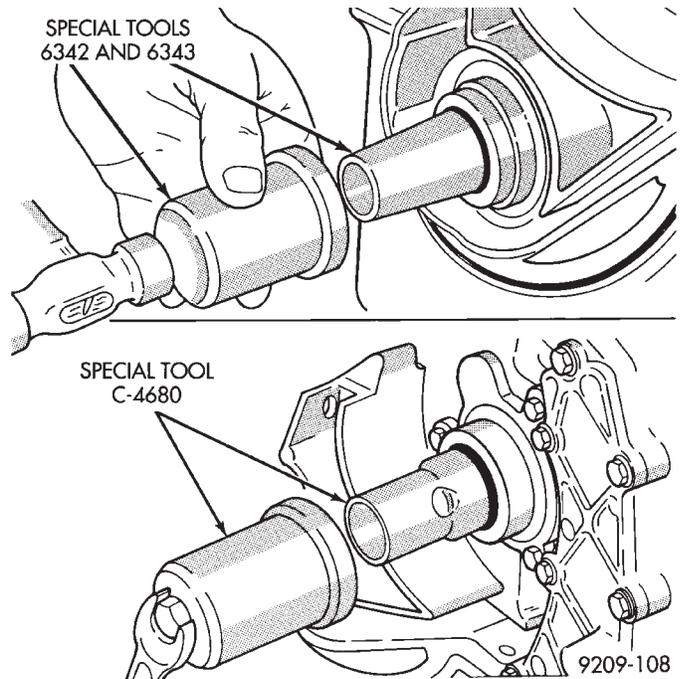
Installing Crankshaft, Intermediate Shaft, and Camshaft Seal
